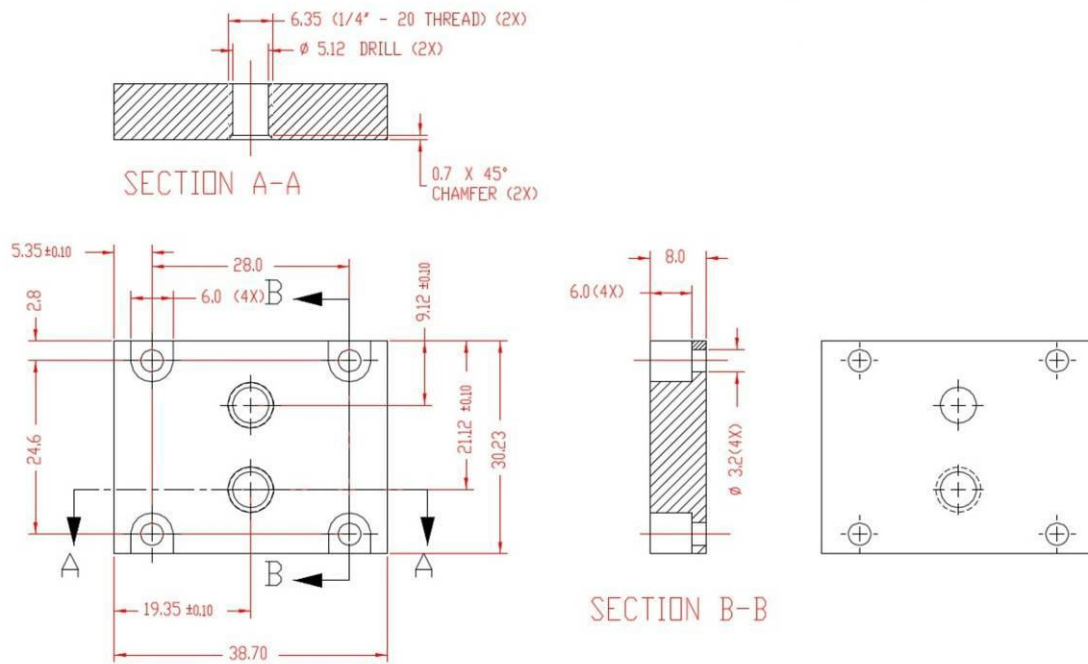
Small Bobcat mounting plate using 1/4 in 20 thread.
